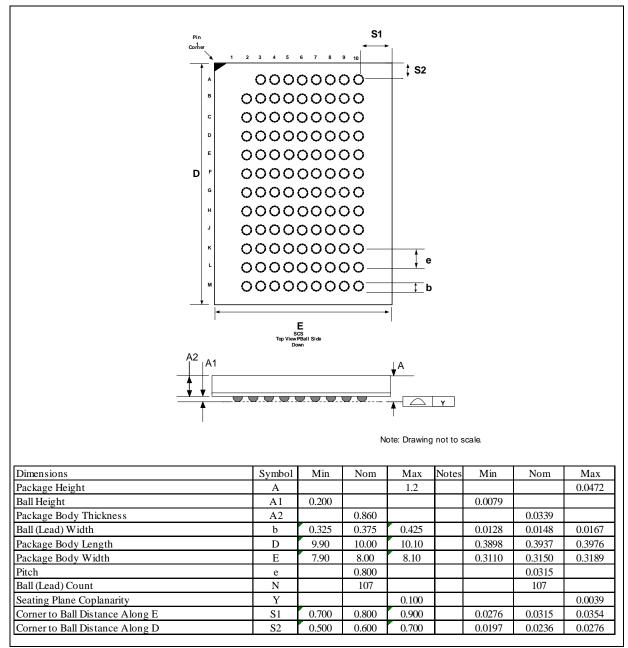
Mechanical Specifications: x16C (107-ball) package (8x10x1.2 mm)
